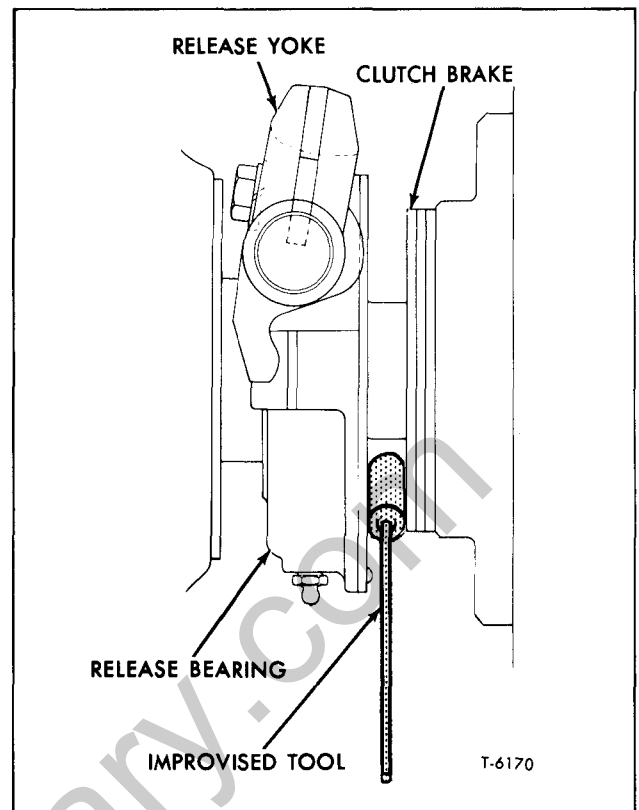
Checking Gap Between Release Bearing and Clutch Brake
